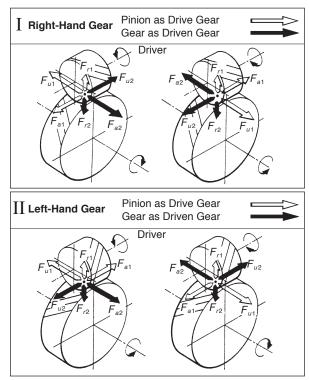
Directions of Forces in a Screw Gear Mesh
